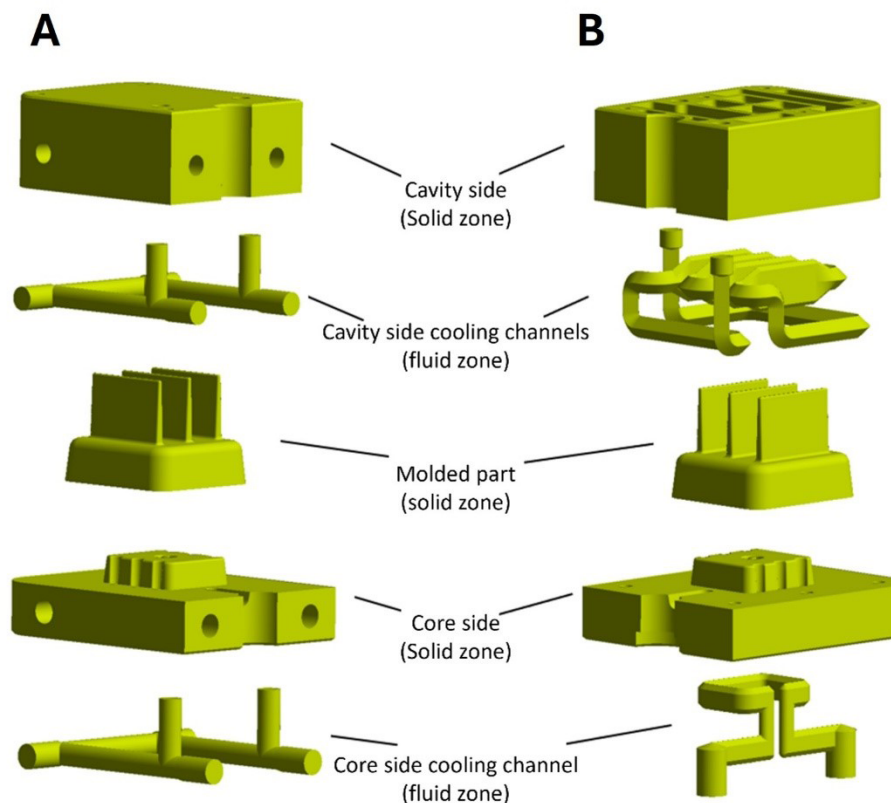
Exploded view of the cavity side, molded part, and core side with (A) conventional cooling channels and (B) conformal cooling channels
